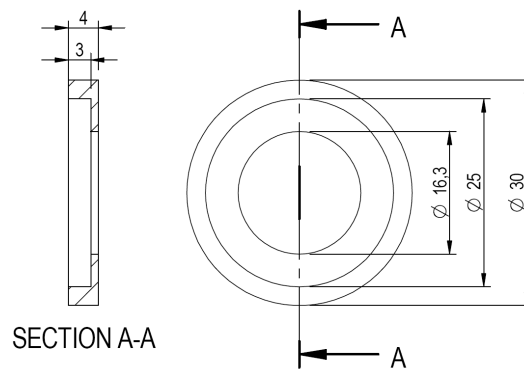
Additional housing component to provide radial constraint to double-lip seal in active seal assembly
